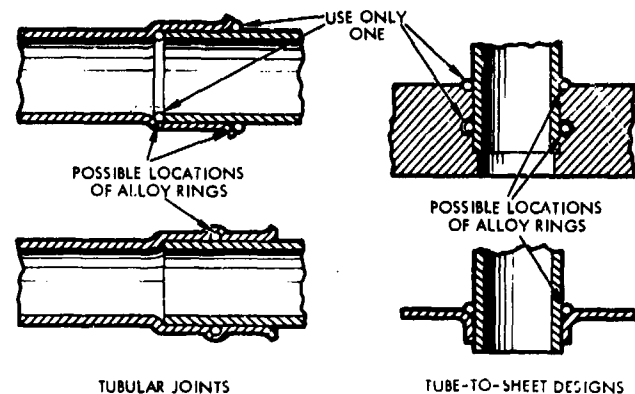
Typical Designs for Brazed Joints
